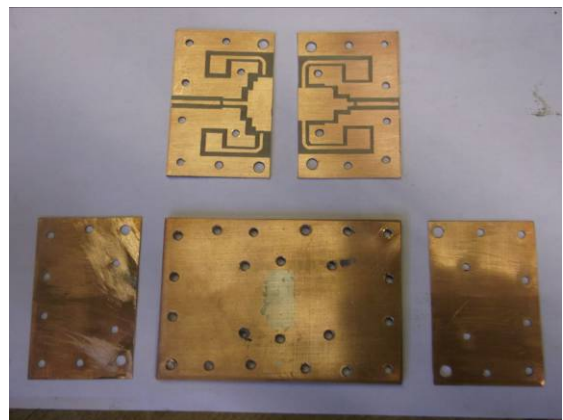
The cut and drilled PCB, heat spreader and 0.5mm copper spacers
